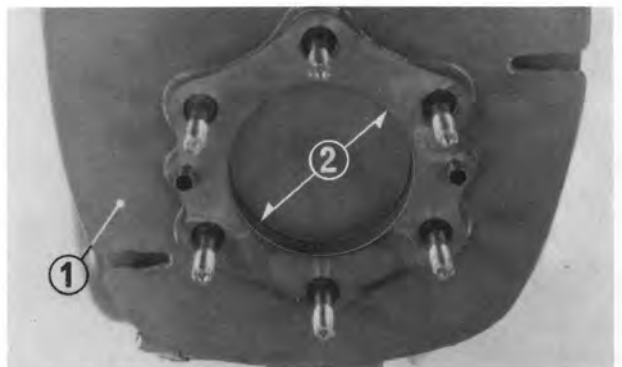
(1) Cylinder (2) Cylinder bore
